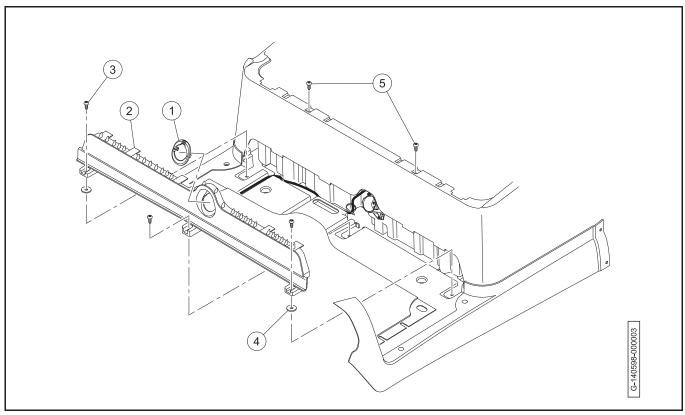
Kick Plate and Charger Receptacle Bezel Removal
